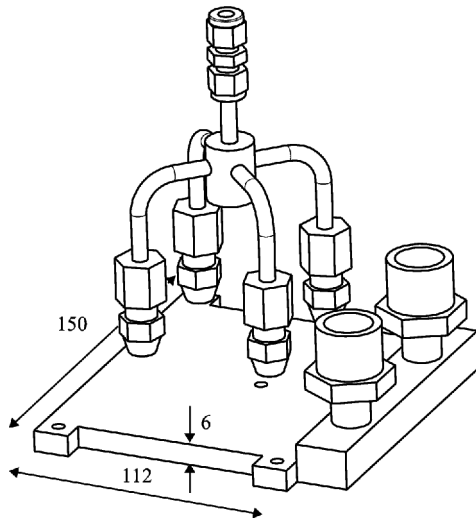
Evaporator and nozzle assembly (dimension: mm).
